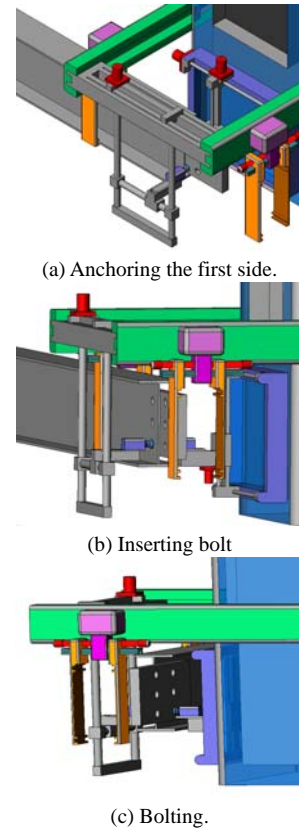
Bolting operation sequence of bolting mechanism Ver. 2.
